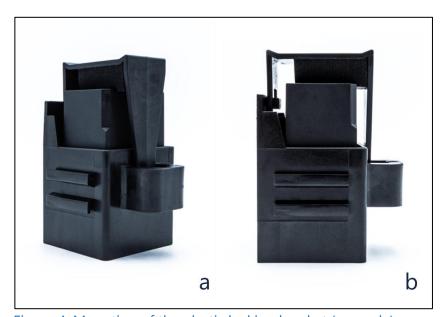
Mounting of the plastic locking bracket (example). a – Angled view; b – Side view.
